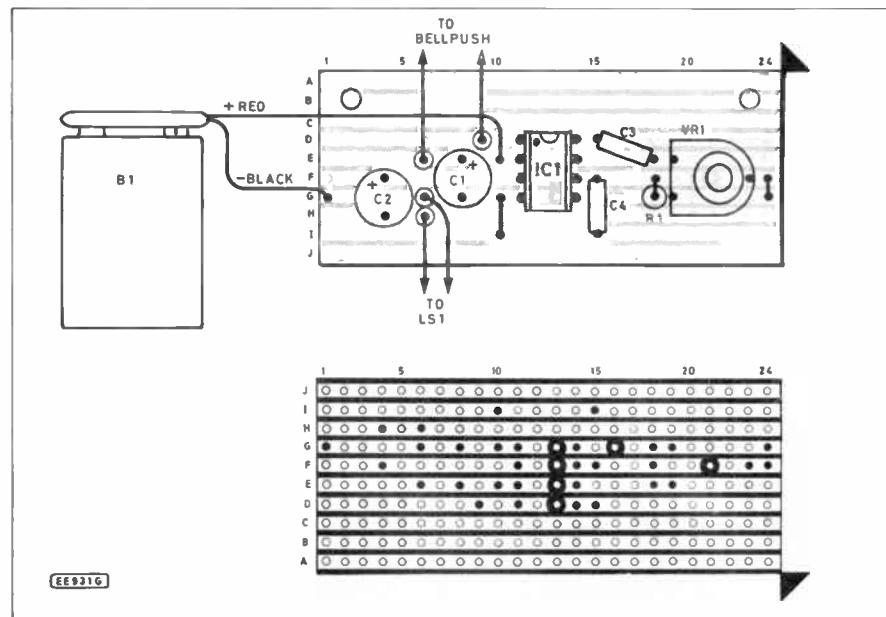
Circuit board component layout, details of breaks to be made in the underside copper tracks and wiring details to the speaker LS1 and bellpush S1. An i.c. holder should be used to mount IC1 on the board.
